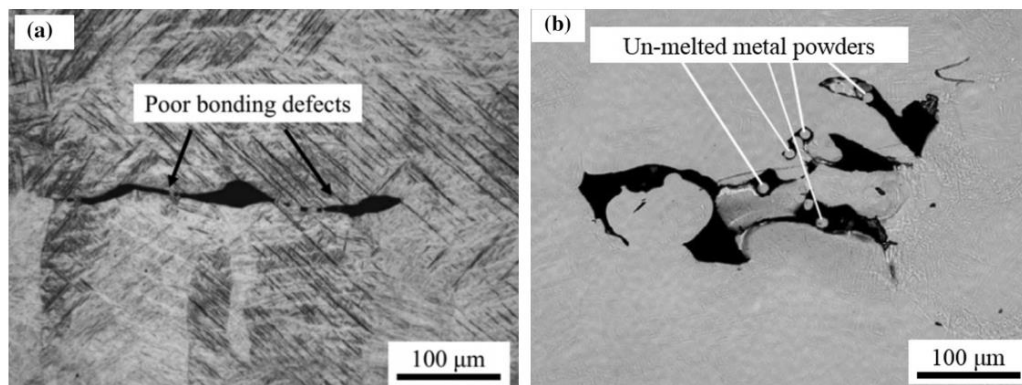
Optical images of LOF defects in LPBF fabricated parts: (a) poor bonding defects; (b) LOF defects with un-melted metal powders[51].
